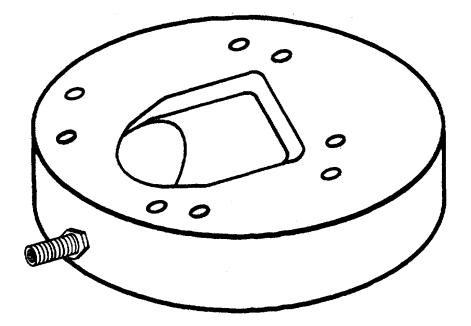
Leak Test Adapter (Sheet 1 of 2)
